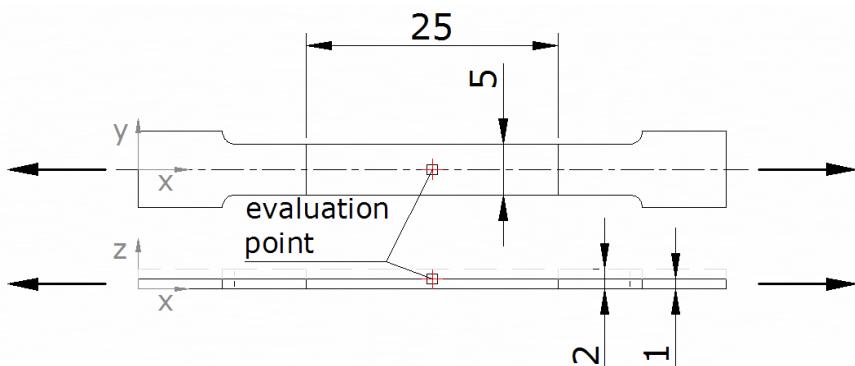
Tensile numerical specimen - main dimensions in millimetres.
